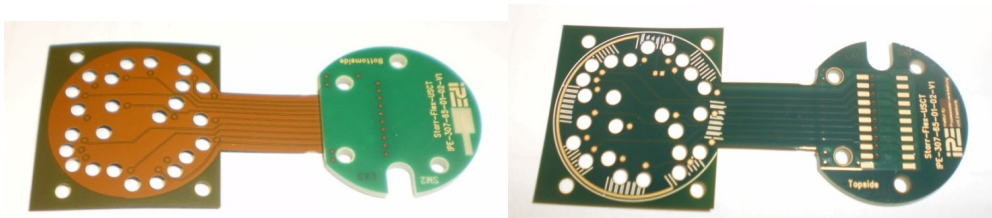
Flexprint PCB layout top side (left) and flex-print PCB backside (right).
